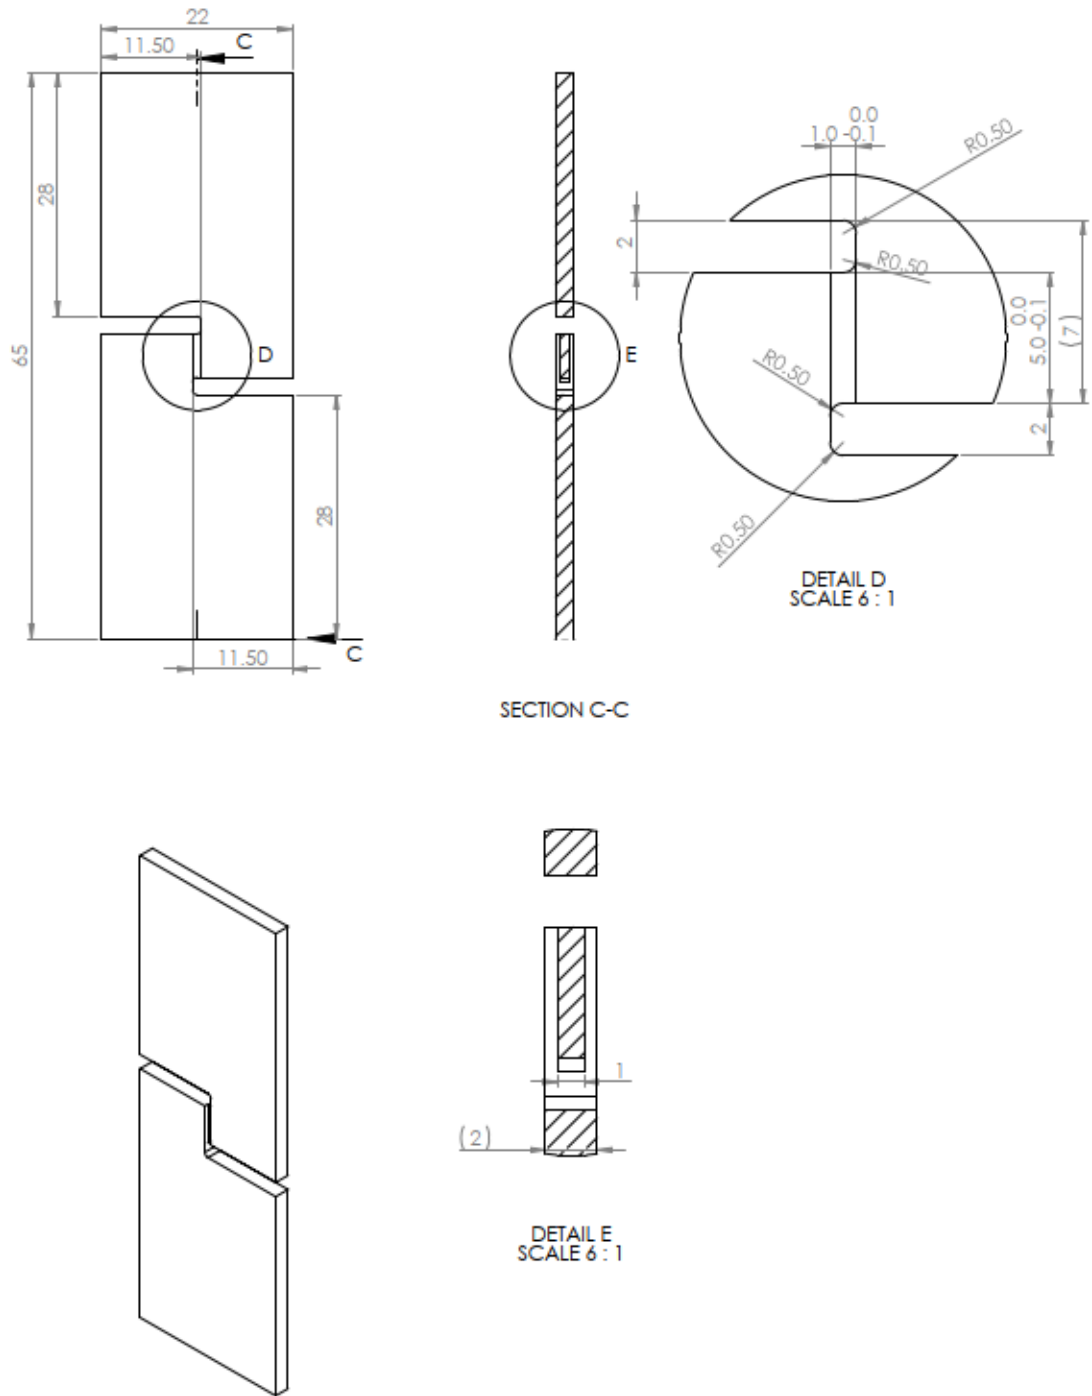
Sketch of the Shear (in tension) specimen. Tolerance ISO-2768 fine for Detail D section and ISO-2768 for the rest.
